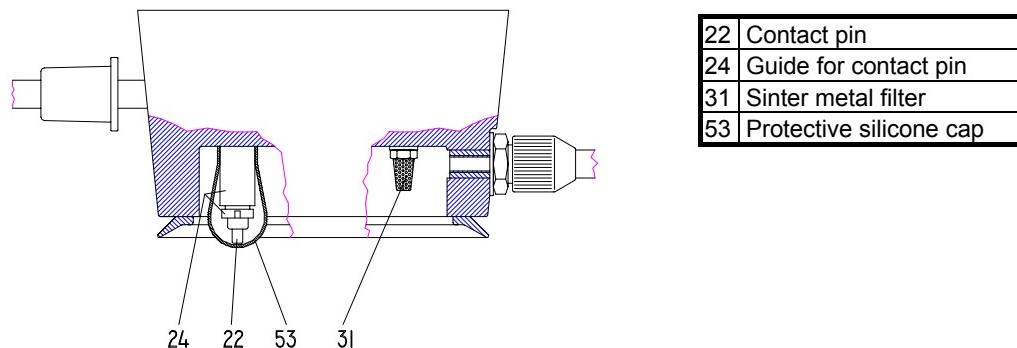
Contact pin with protective silicone cap and sinter metal filter
